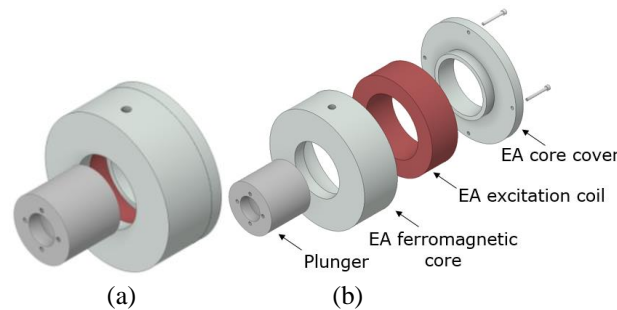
EA geometry: (a) assembled view, (b) exploded view.
